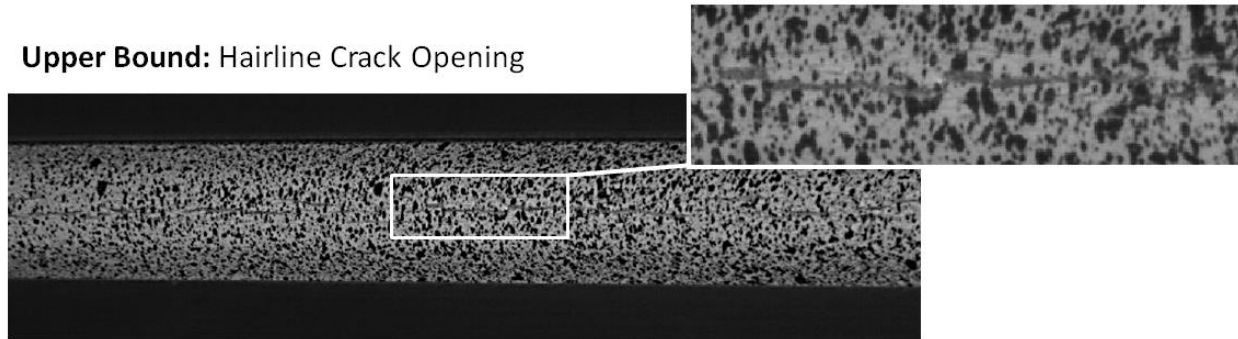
Deformed DP980 specimen at VDA load threshold. Multiple hairline cracks were observed on the tensile surface. These cracks are not due to paint failure and these same cracks continued to open up as part of the fracture process.
